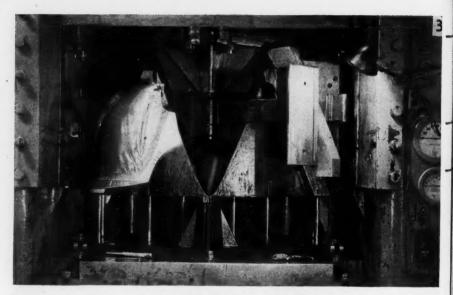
The Forming Die for the Single-Piece Skin Concentrates the Wrinkles Produced in Forming so that They will be Removed in the Trimming Operation
